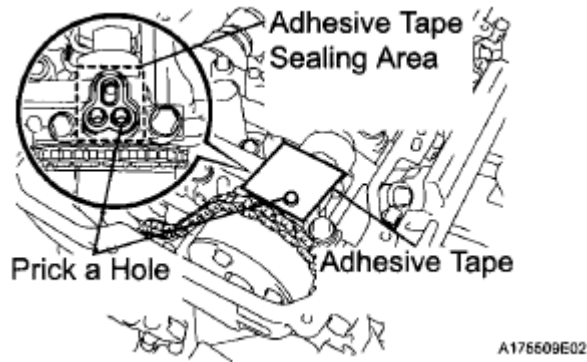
Identifying Camshaft Timing Gear Sealing Area
